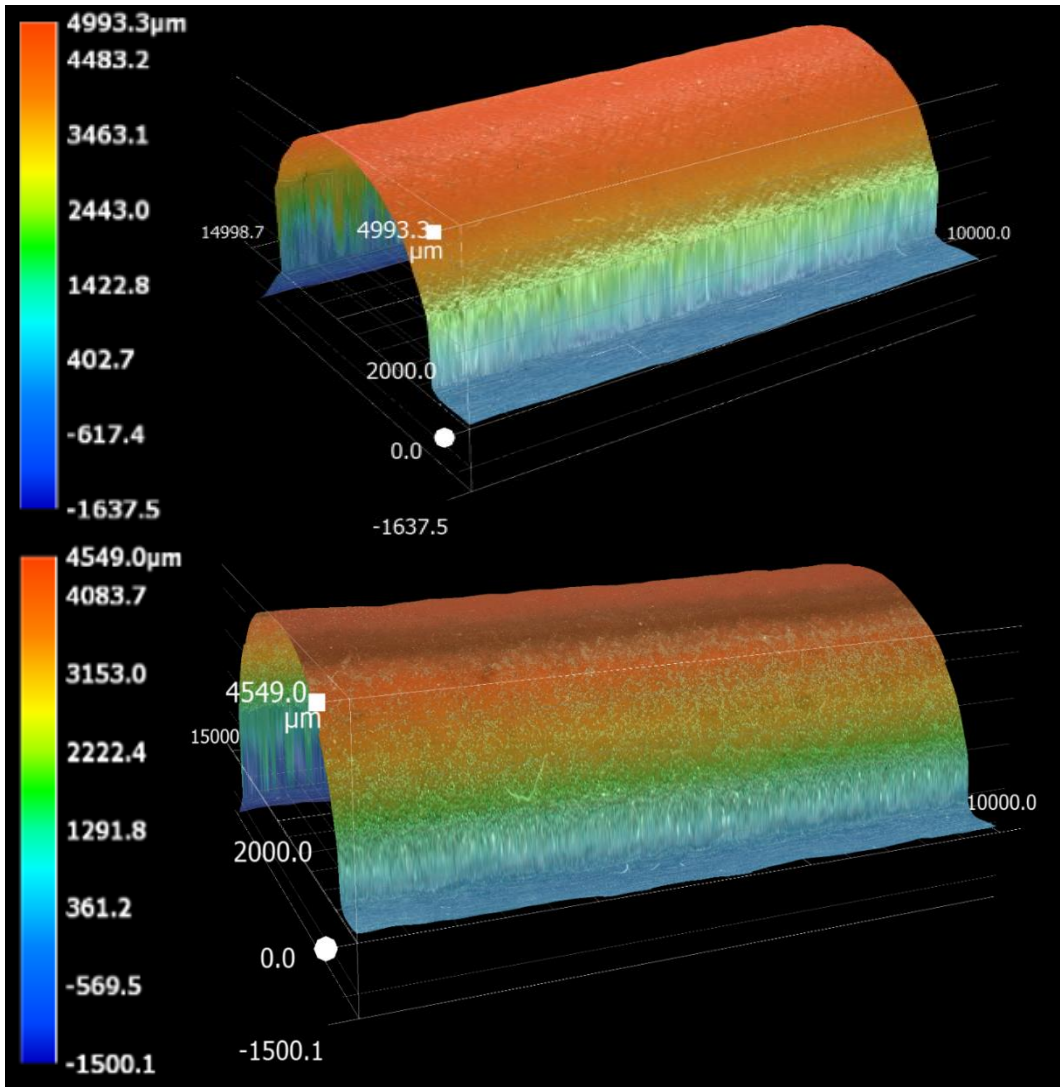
3D profiles of Recoater arm no. 2 before (top) and after (bottom) the print
